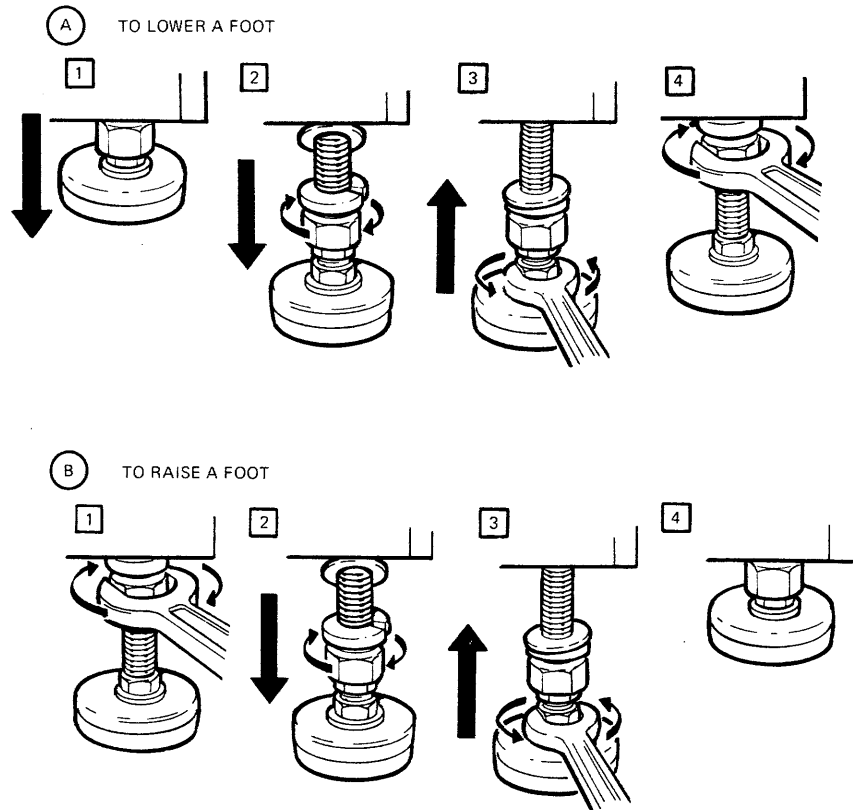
Cabinet Leveler Feet Assembly and Extension Stabilizer
